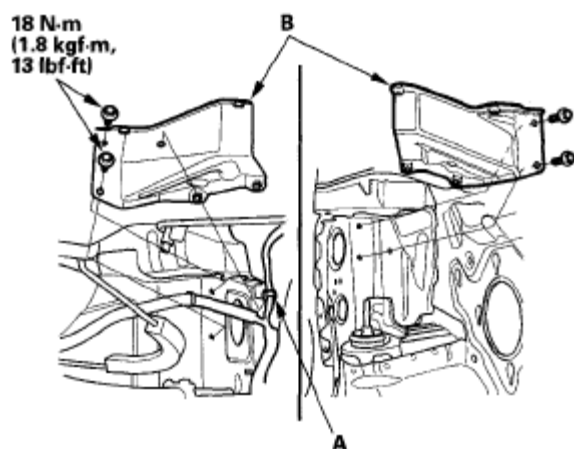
Identifying Harness Clip, Rear Shelf Gussets With Torque Specifications
